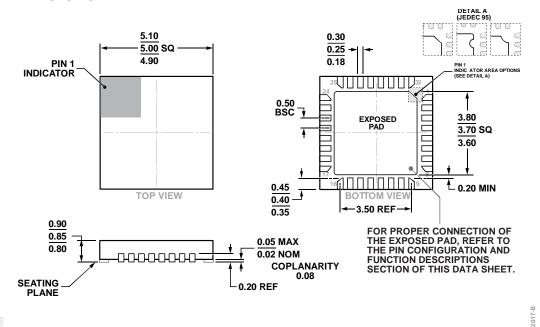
32-Lead Lead Frame Chip Scale Package [LFCSP] 5 mm × 5 mm Body and 0.85 mm Package Height (HCP-32-1)
